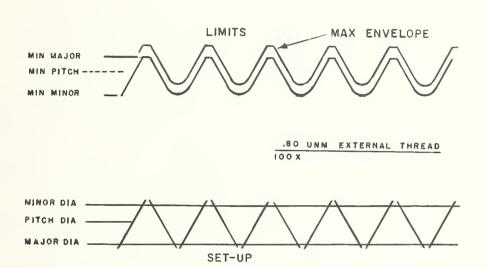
Suggested chart for projection inspection of external Unified Miniature threads,
